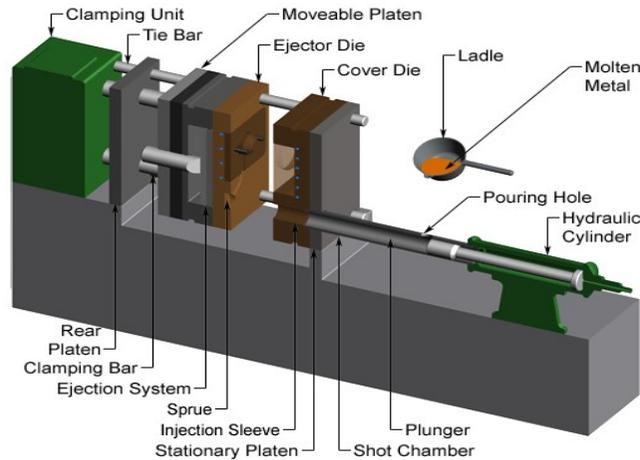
Horizontal Cold-chamber die casting machine [8]
